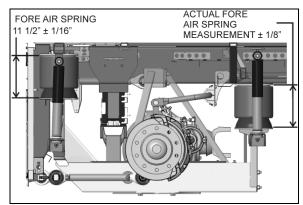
DRIVE AXLE AIR SPRING CLEARANCE 16195
